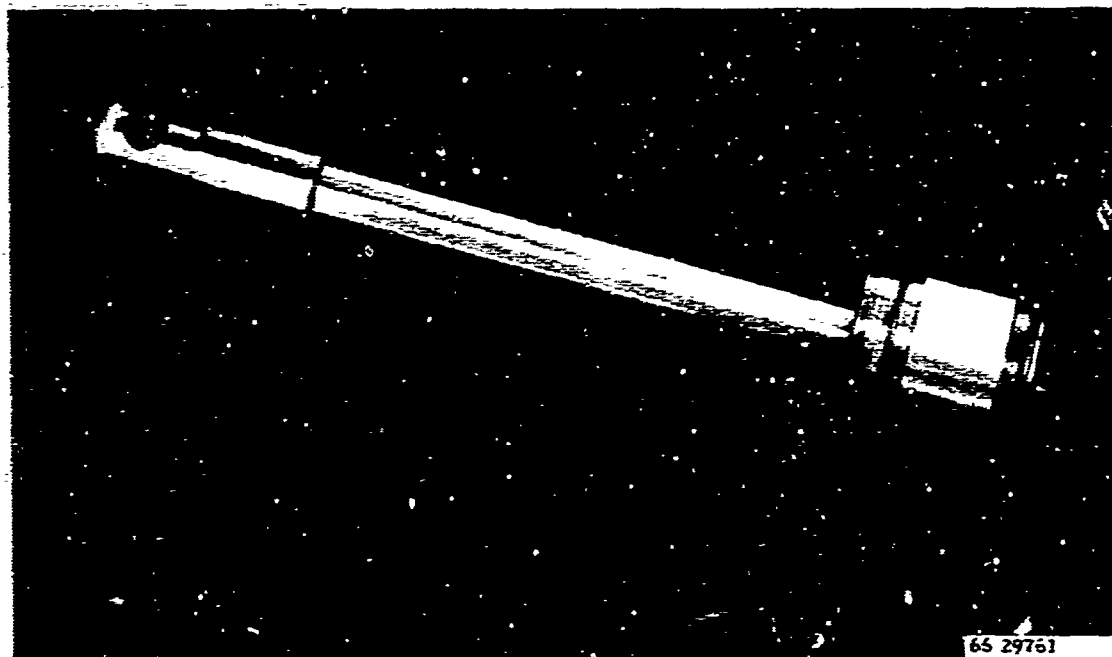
QKS1319 CFA Test Vehicle - Cathode Support Assembly
